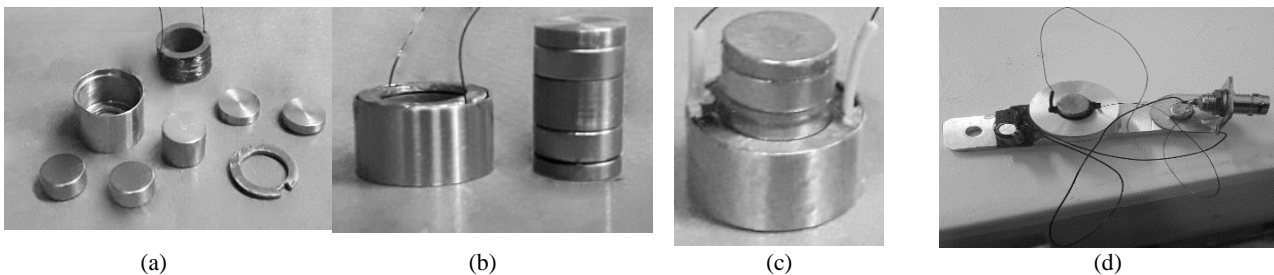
Parts of the MIG with the fixture such that a): parts of the MIG in the separate form, b): assembling the fixed and moving parts of the MIG, c): complete installation of the MIG along with the signal transducer, and d): complete assembly.
